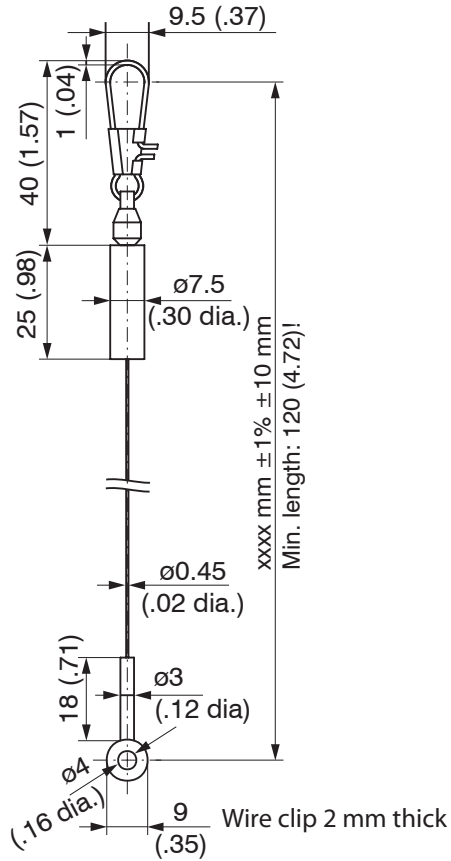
WE-xxxx-CLIP, dimensions in mm (inches), not to scale
